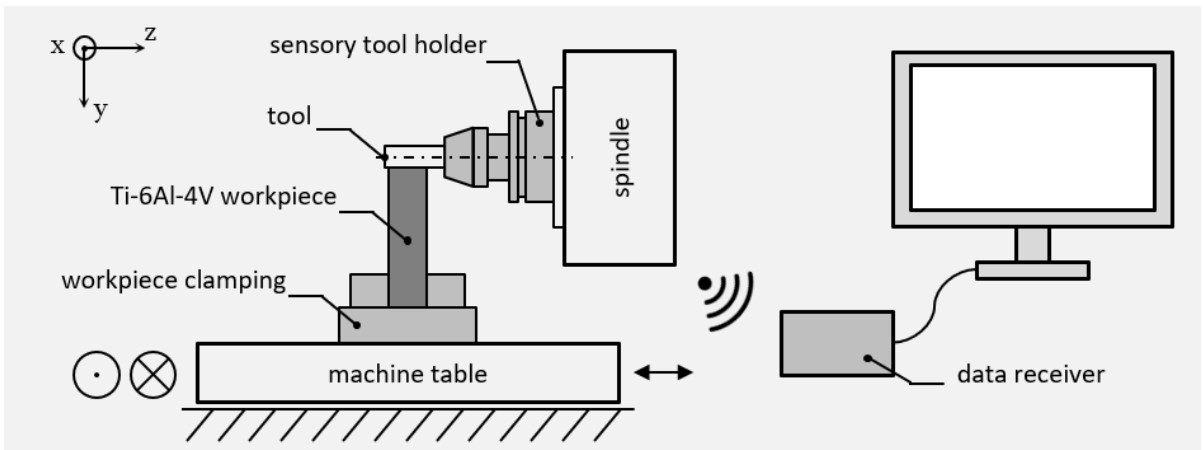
Experimental setup using the sensory tool holder for the in-process measurement of the cutting forces based on WIMMER ET AL. (2023)
